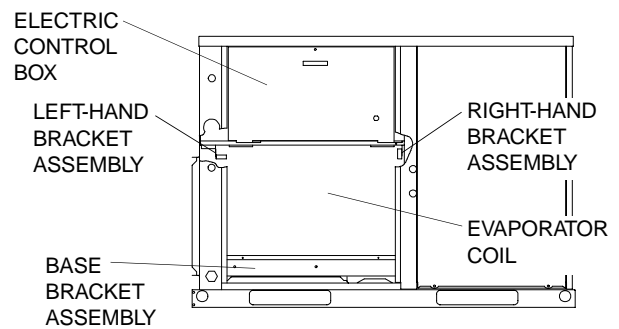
FILTER / FRAME KIT ASSEMBLY
